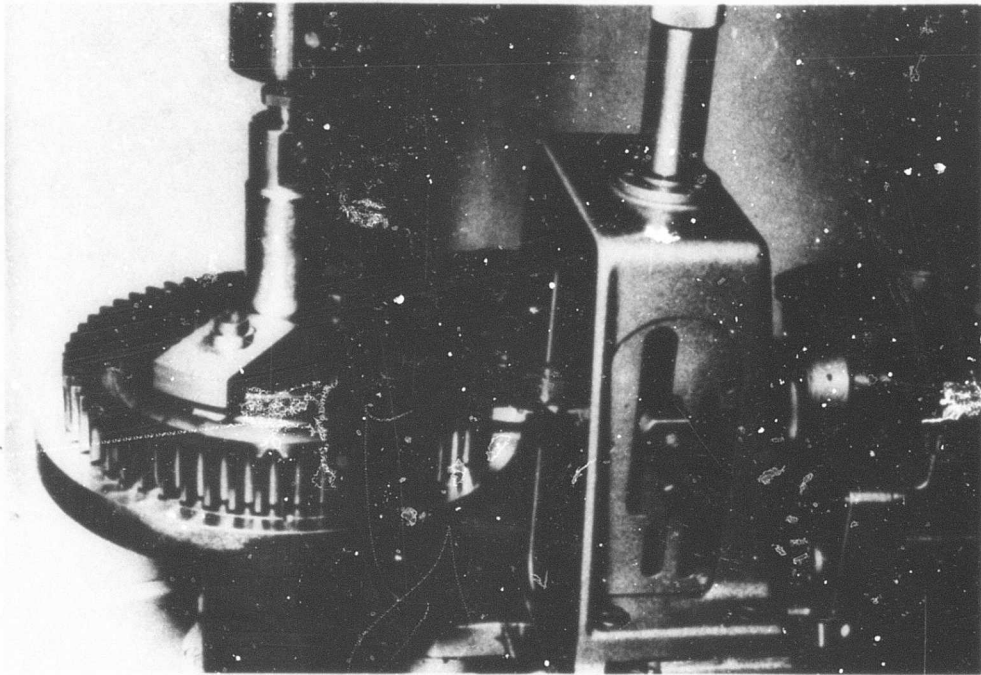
Measurement of Profile on the Lower Stage Planetary Sun Gear Performed by the Hofler Gear Measuring Machine.
